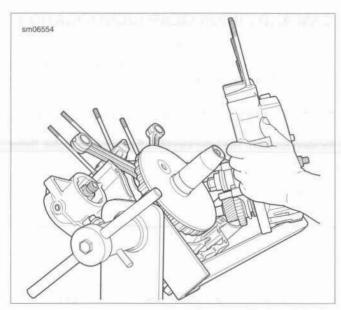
Assembling Crankcases with Crankshaft Guide Tool (Part No. HD-42326-B)
